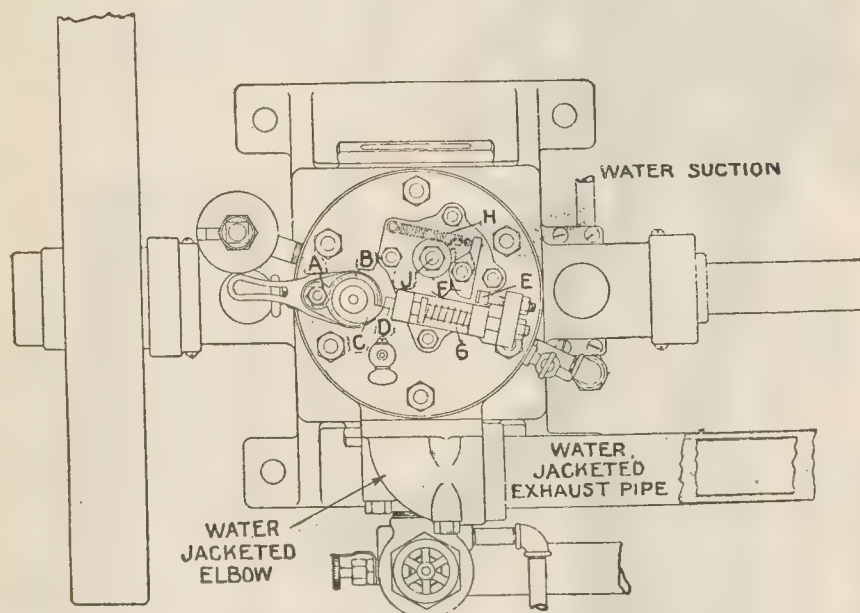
,080.—Plan of Fay and Bowen two cycle engine. *In construction*, the smaller gear A, is attached to the igniter shaft, and turns with it. The gear drives a larger gear B, the teeth of which show around and below the cam C. *In operation*, as the igniter shaft turns, this larger gear B, turns the cam C. The cam C, pushes back the plunger D, and as the plunger D, slips off the point of the cam C, its other end or hammer E, strikes the movable electrode F, breaking the electric current, and producing a spark. In the illustration, the relation of the electrodes and sparking points *inside* of the firing chamber is indicated by dotted lines, the spring H, brings the movable electrode F, to its place again, when the plunger D, backs off for the stroke.
